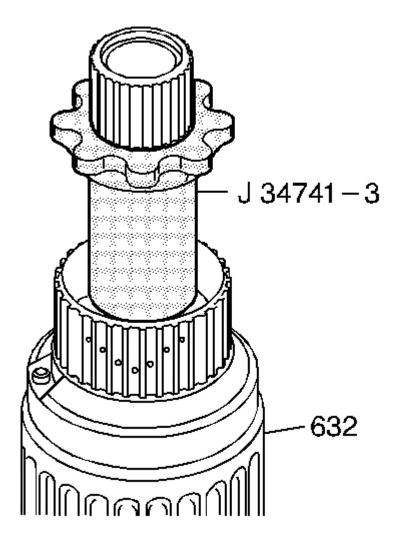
Installing J 34741-3 Over The Seals Courtesy of GENERAL MOTORS CORP.
